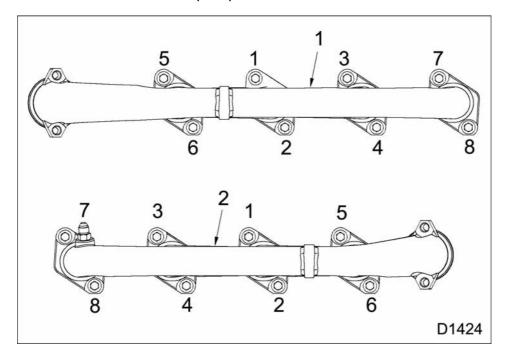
Tightening sequence for exhaust manifold mounting bolts
